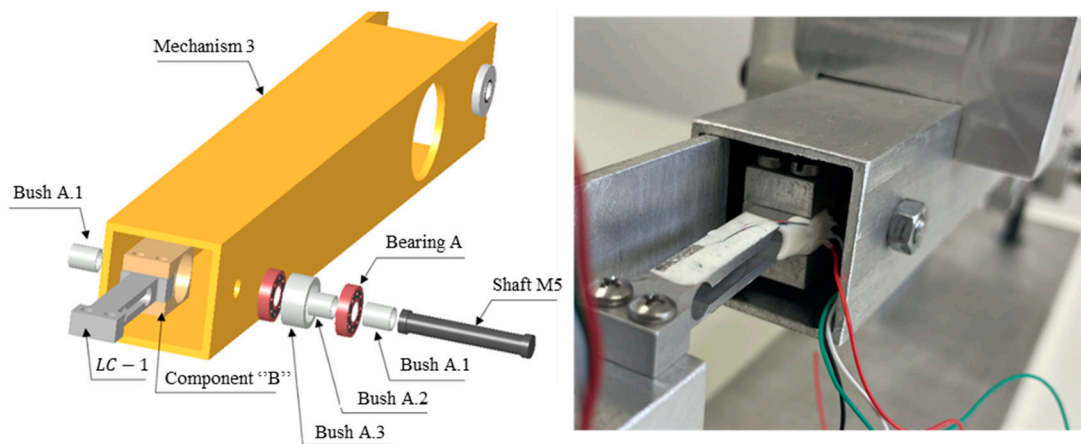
3D view (left) and manufactured assembly (right) for the lift measurement.
